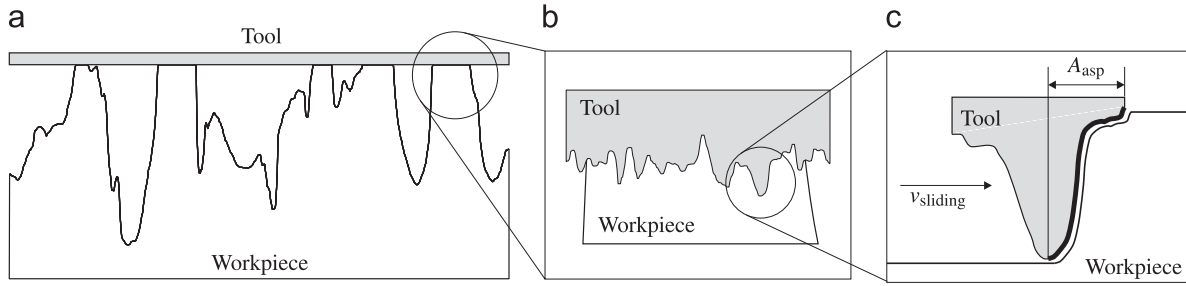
Schematic view contacting tool asperities. (a) Rough crushed workpiece surface; (b) Zoom-in on rough tool surface; (c) Zoom-in single asperity scale.
